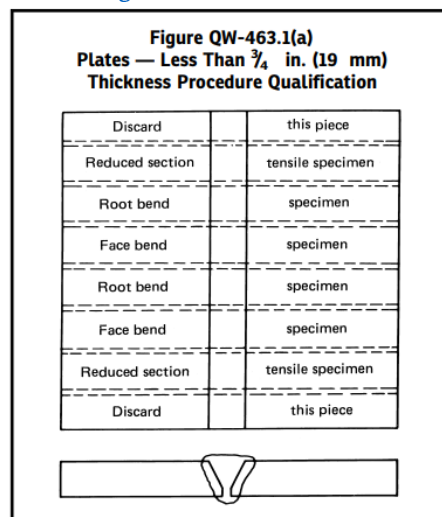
Cutting Plan for Destructive Test According to ASME Section IX [6]
